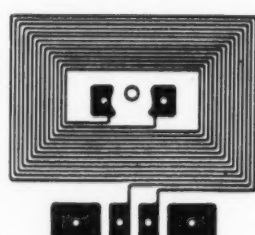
Printed coil. (Drawing courtesy RCA)
